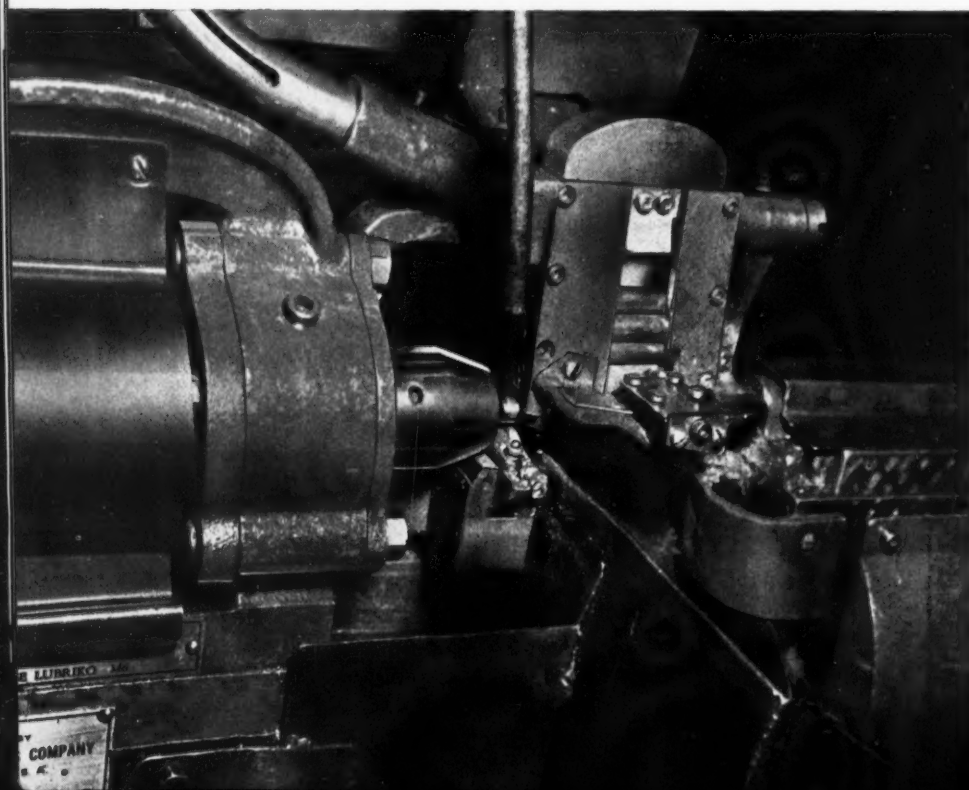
After being Headed on "Bumping" Machines, the Cartridge Cases are Turned on the Base End by a Form Tool on Machines of the Type Here Shown
